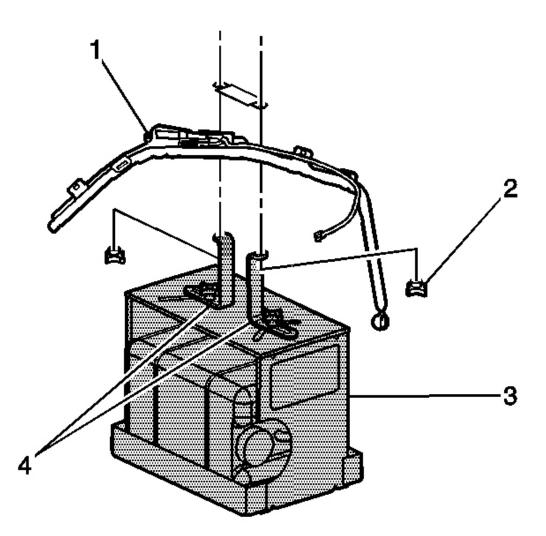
Identifying Fasteners Holding Side Impact Module To Deployment Fixture Courtesy of GENERAL MOTORS CORP.
